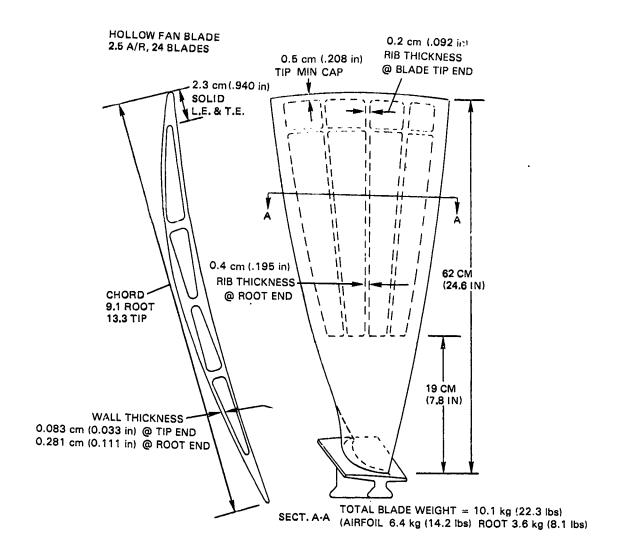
Shroudless Fan Blade Cross-Section
